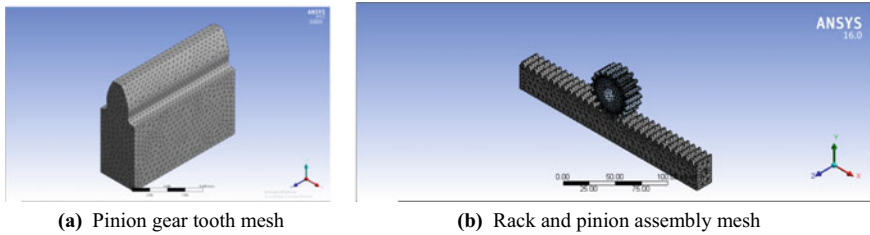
a Pinion gear tooth mesh. b Rack and pinion assembly mesh. *Source* ANSYS user manual [16]
